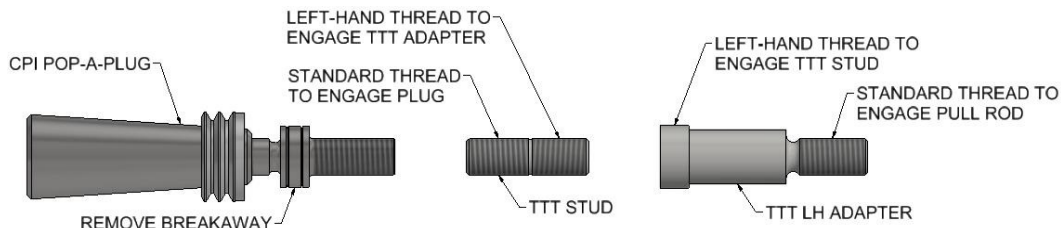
TTT ADAPTER KIT & CPI PLUG
